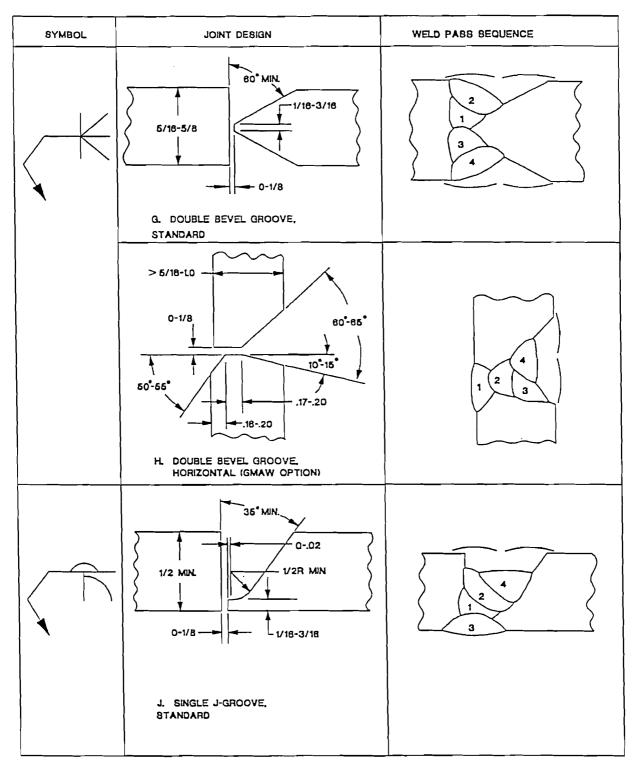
A. Recommended Joint Designs and Weld Pas Sequences (Sheet 1 of 4)
